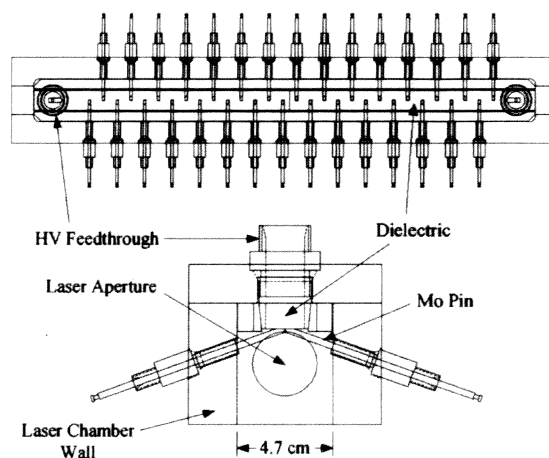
Front (upper panel) and end-on (lower panel) views of the V configuration for the intermediate electrodes (molybdenum pins). A portion of the main electrode assembly and the bottom plate for the laser head have, for clarity, been removed. Note that the upper and lower panels are not drawn to the same scale.
